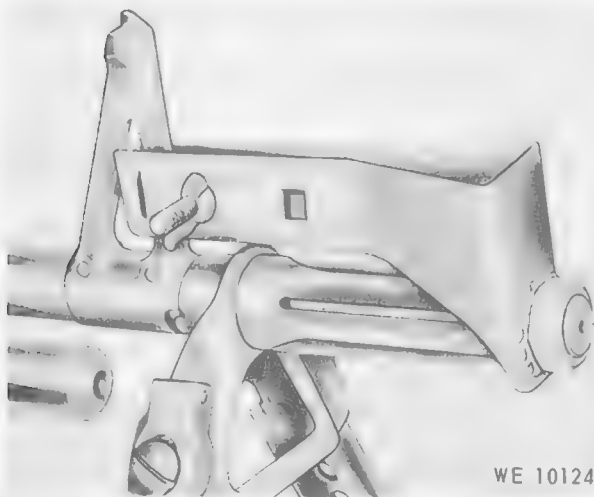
7.62-mm machine gun M60 with blank ammunition firing attachment M13 installed.
